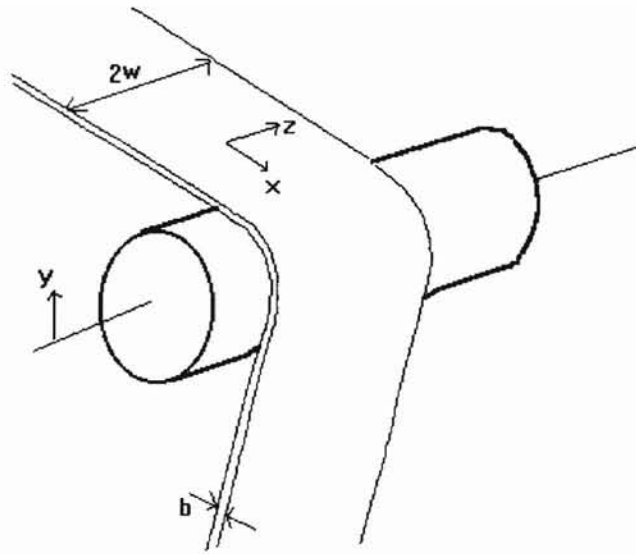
Three Dimensional Schematic of Foil Bearing
